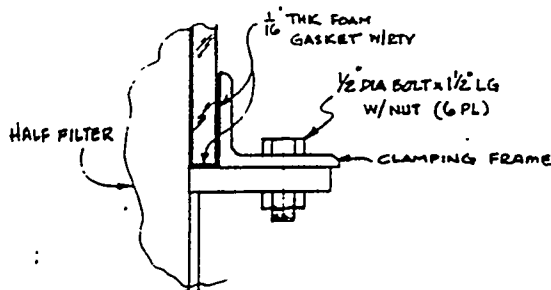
DETAIL M (ALL DETAILS NOT SHOWN SEE)
